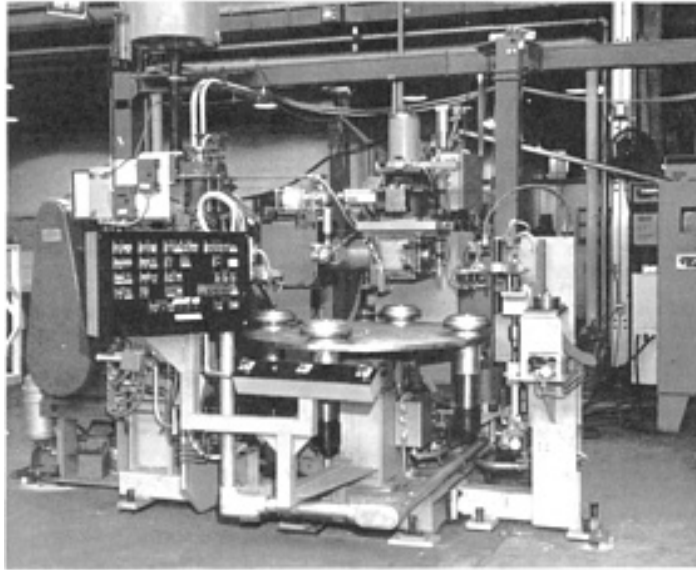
CUSTOM-DESIGNED EBW-MW SYSTEM USED TO PRODUCE AUTOMOTIVE PARTS. COURTESY OF SCIACKY BROS., INC.
